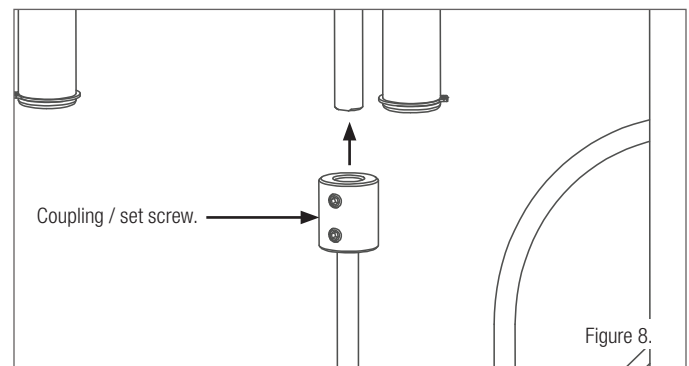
Attach the remaining coupling on the other end of the flex shaft and then to the lift rod of your router lift. Make sure to fully insert the lift rod into the coupling. Firmly tighten both set screws. Use the crank handle to turn the flex shaft and coupling. If the coupling or flex shaft turns without the lift rod turning, the set screws may not be tight enough.
